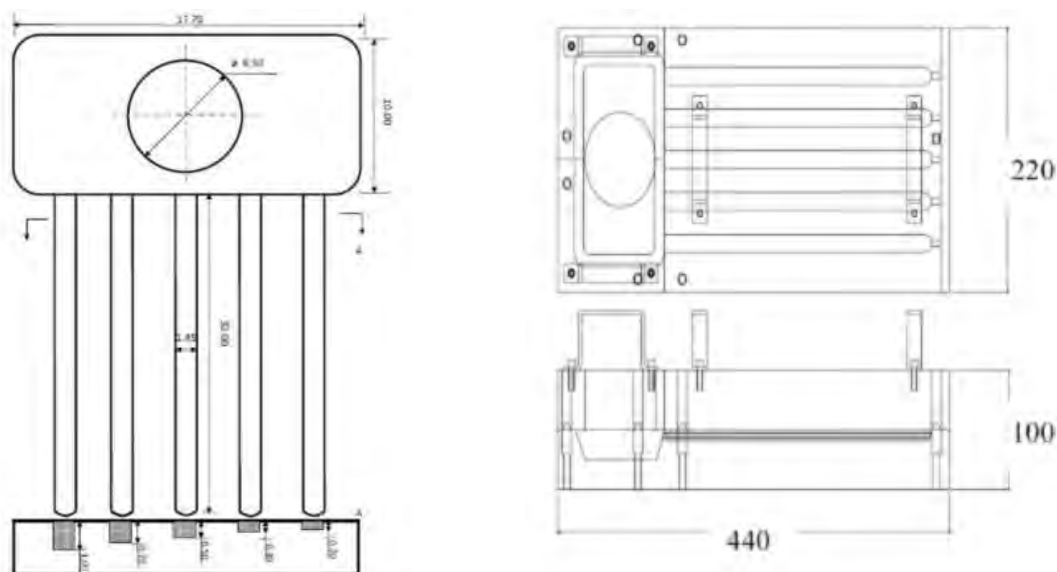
Design of Fluidity strip mould test configurations [7].
